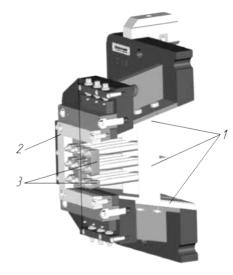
The cross-section of die carrier Bongioanni 1 – core; 2 – die; 3 – void formers
